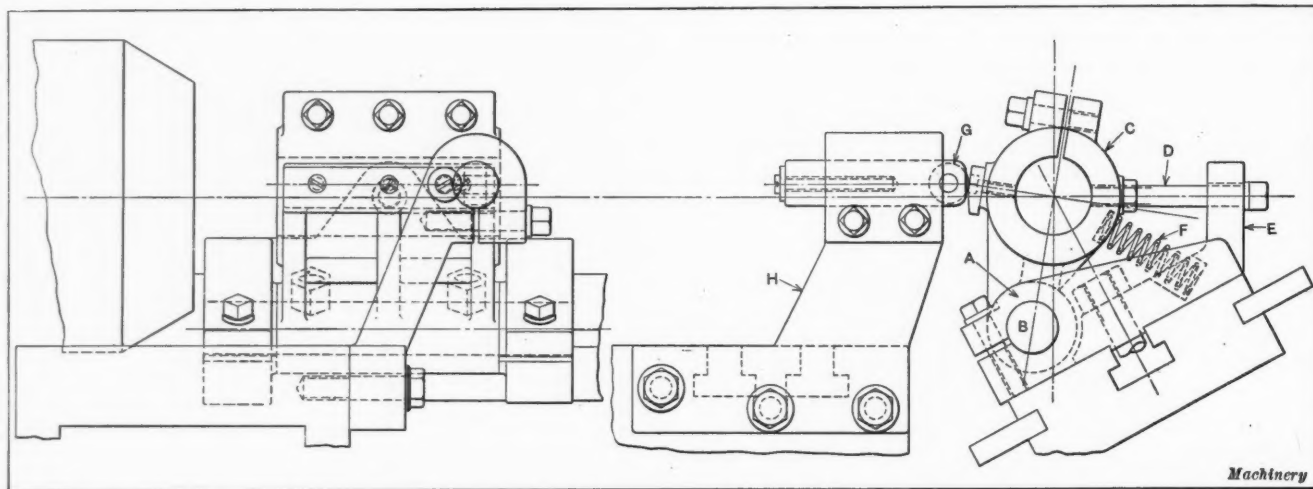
Another Type of Internal Necking or Recessing Tool-holder
